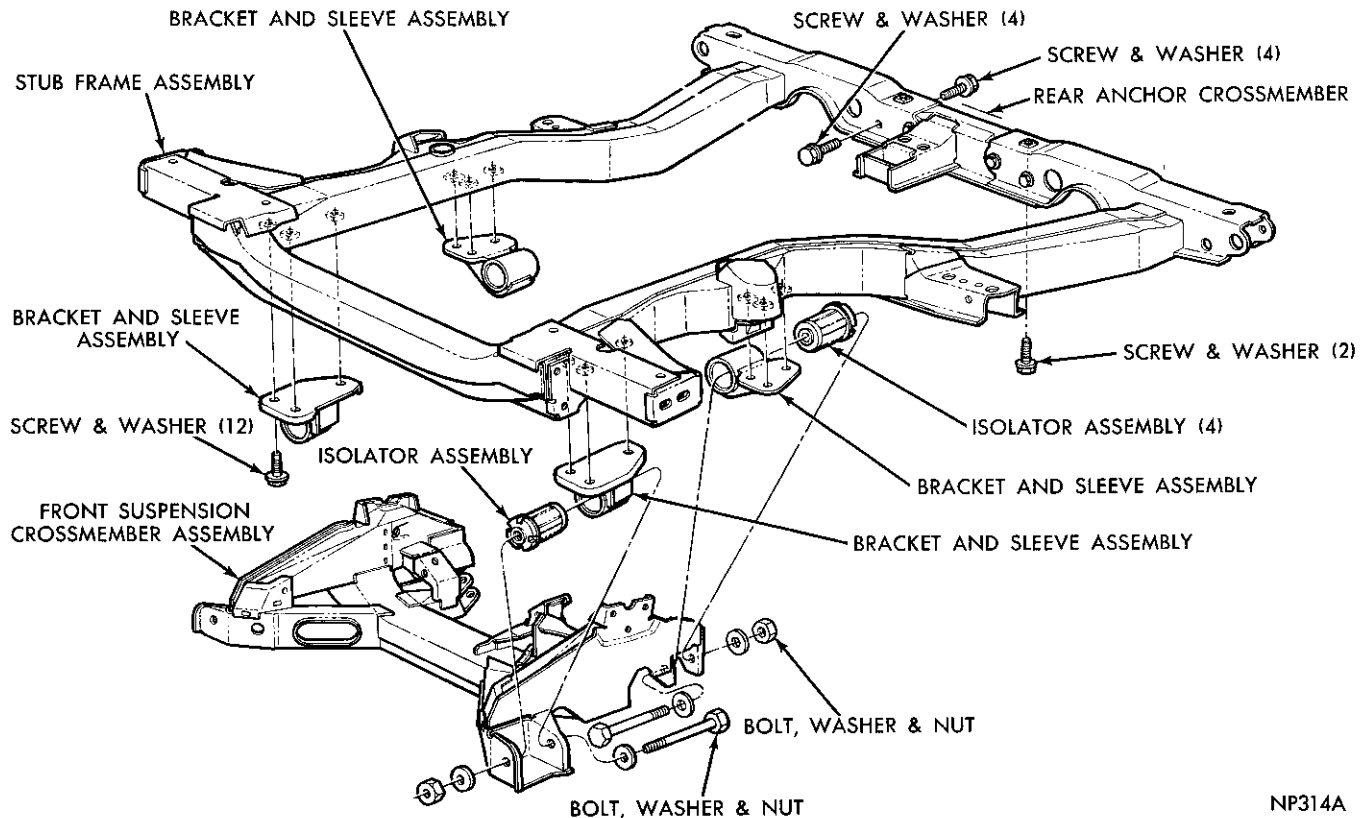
Rubber Isolated Front Crossmember and Stub Frame Assembly
